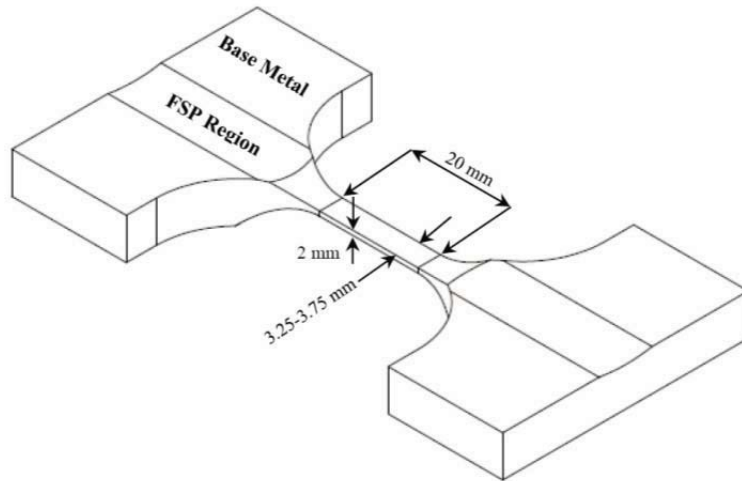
Schematic drawing showing the dimensions of the tensile specimens and their location relative to the friction stir processed region.
